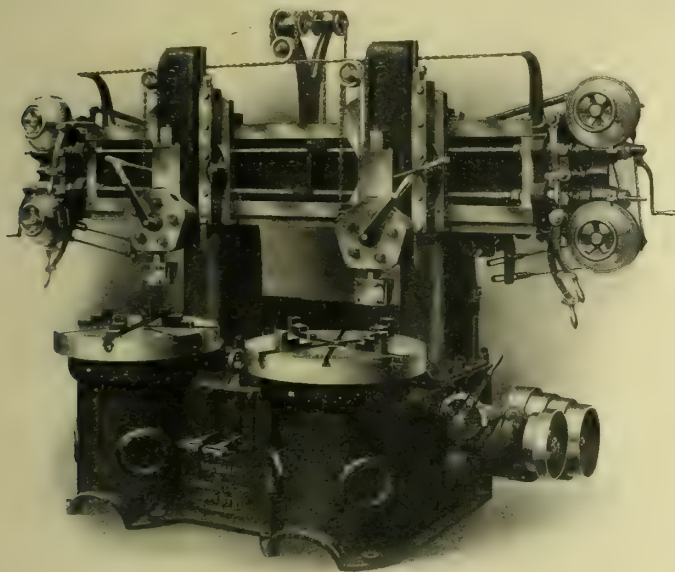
36IN. DUPLEX BORING AND TURNING MILL. MESSRS WEBSTER AND BENNETT, LTD., COVENTRY.
